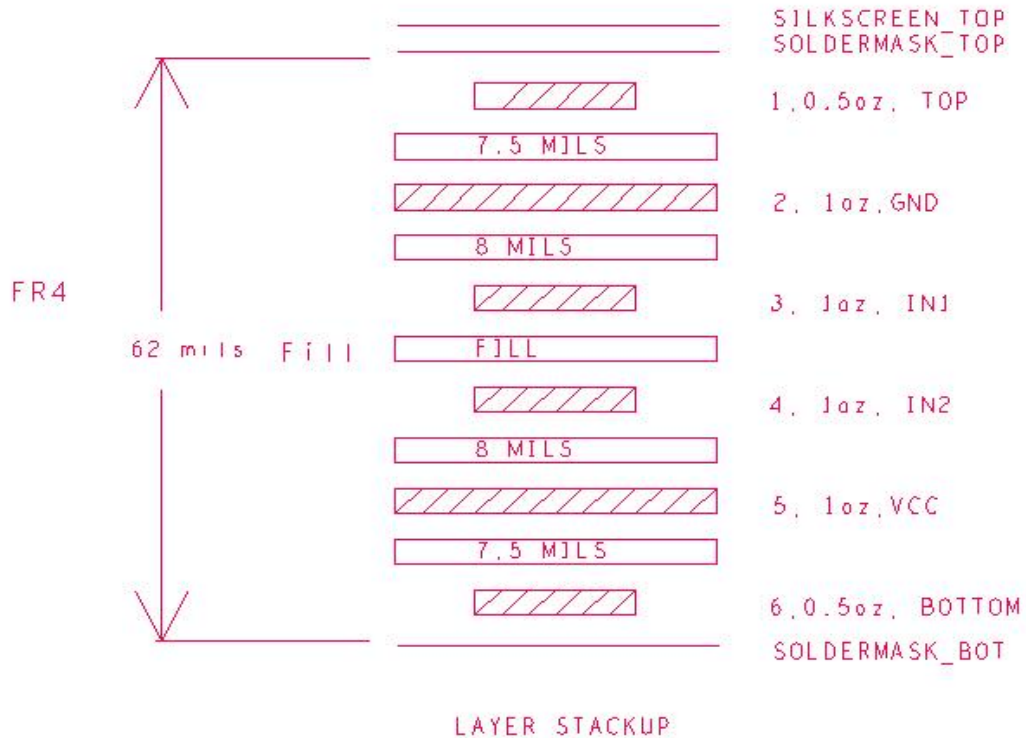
Actual PCB Stackup for the 20050504v02 boards
